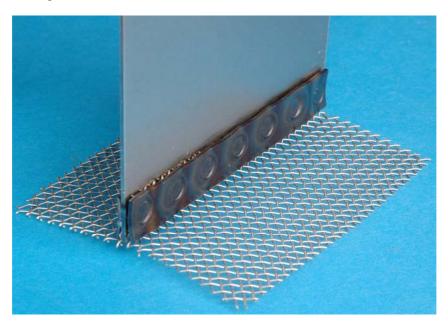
Skeletal reinforcement transition joint produced by resistance welding for a composite-to-metal T joint
